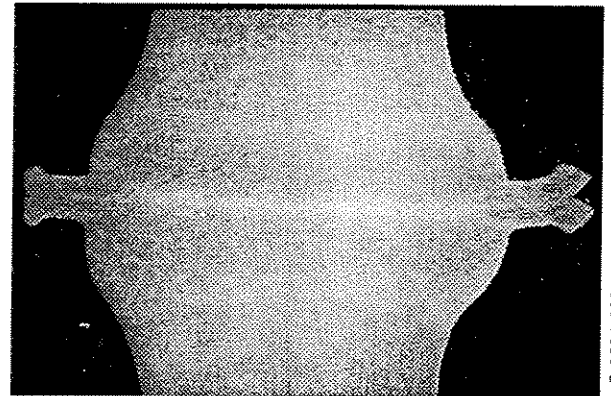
Material D weld macrostructure. (magnification 5 $\times$ )
